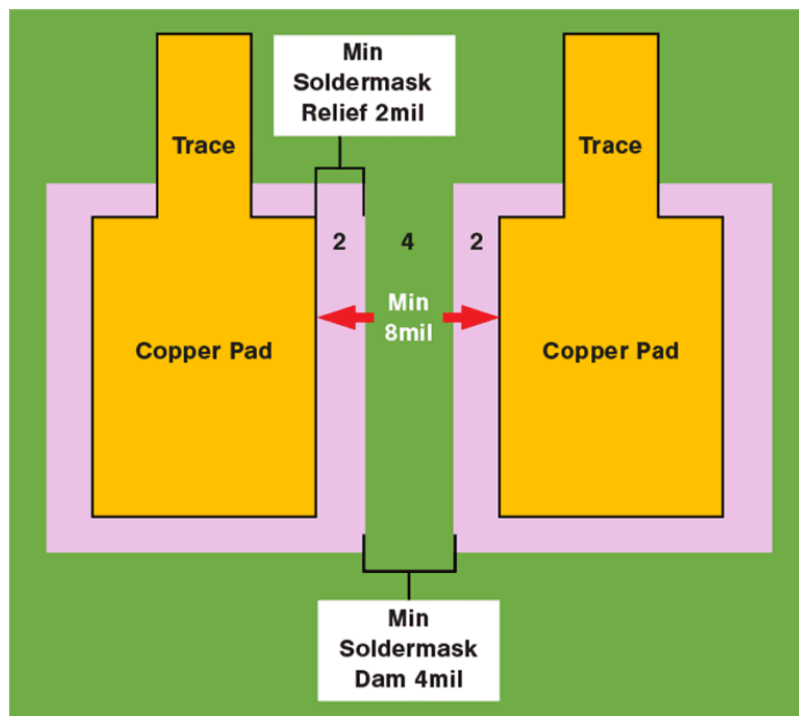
Solder mask coating between SMD pads prevents solder paste from flowing across parts. (Source: IPC-A-610)
